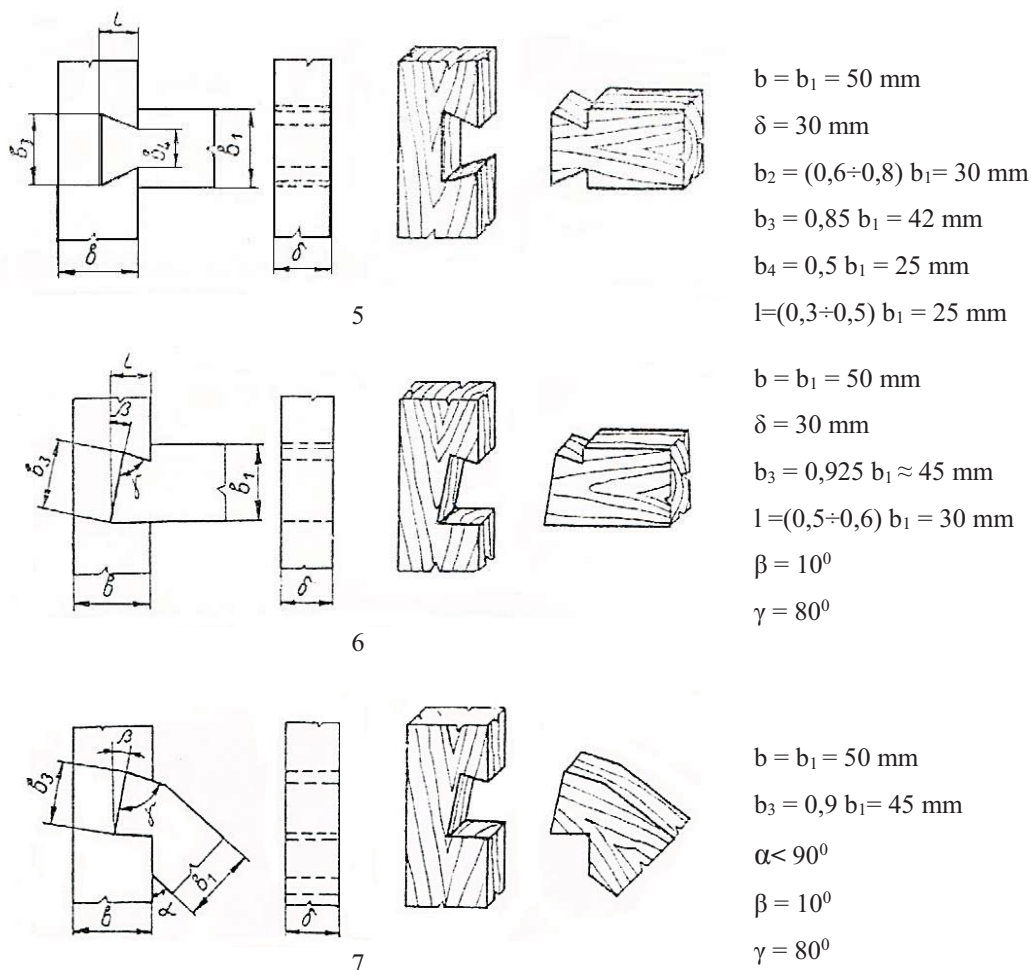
T-shape corner dovetail mortise and tenon joints: 5 – bilateral dovetail mortise and tenon joint at a right angle; 6 – one-sided dovetail mortise and tenon joint at right angle; 7 – one-sided dovetail mortise and tenon joint at other than right angle
